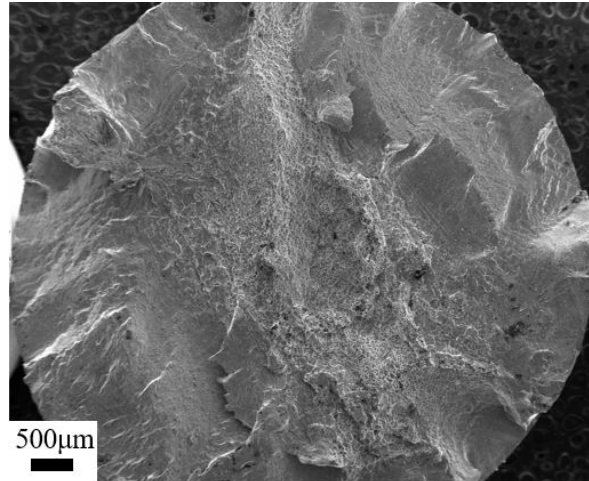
General view of the fatigue fracture surface of condition R DSS sample broken in 45.432 cycles, tested at 95% of σ_{yield} .
